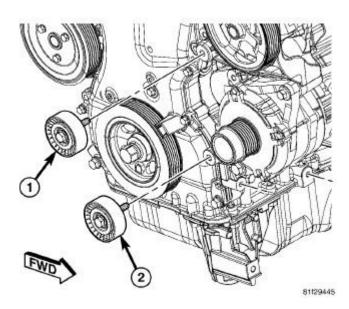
Removing/Installing Accessory Drive Belt Upper & Lower Idler Pulley Courtesy of CHRYSLER GROUP, LLC
